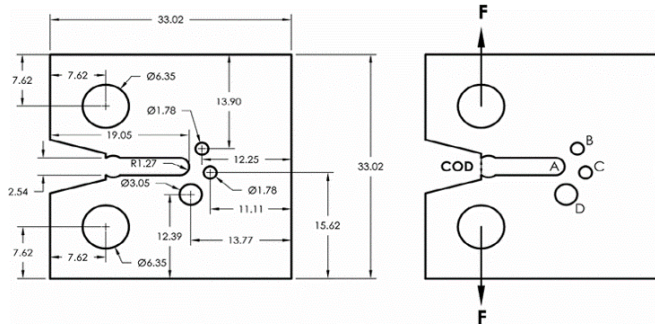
Geometry of test coupon used in Fracture Challenge. Dimensions are in millimeters.
